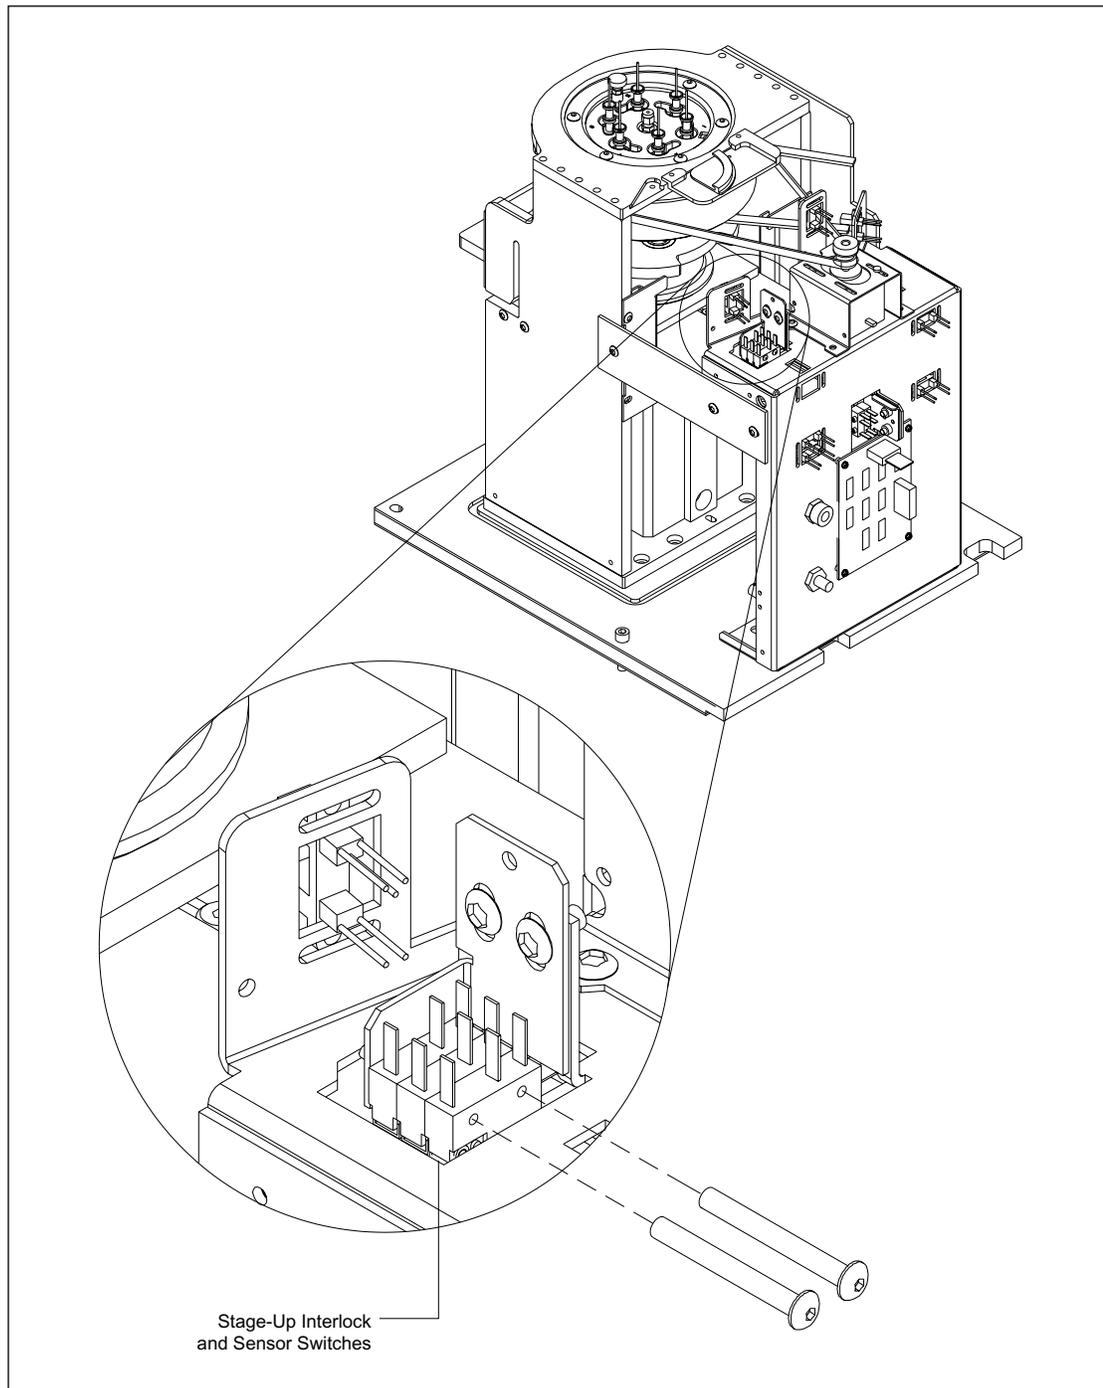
Anode Stage-Up Interlock and Sensor Switch Mounting.
